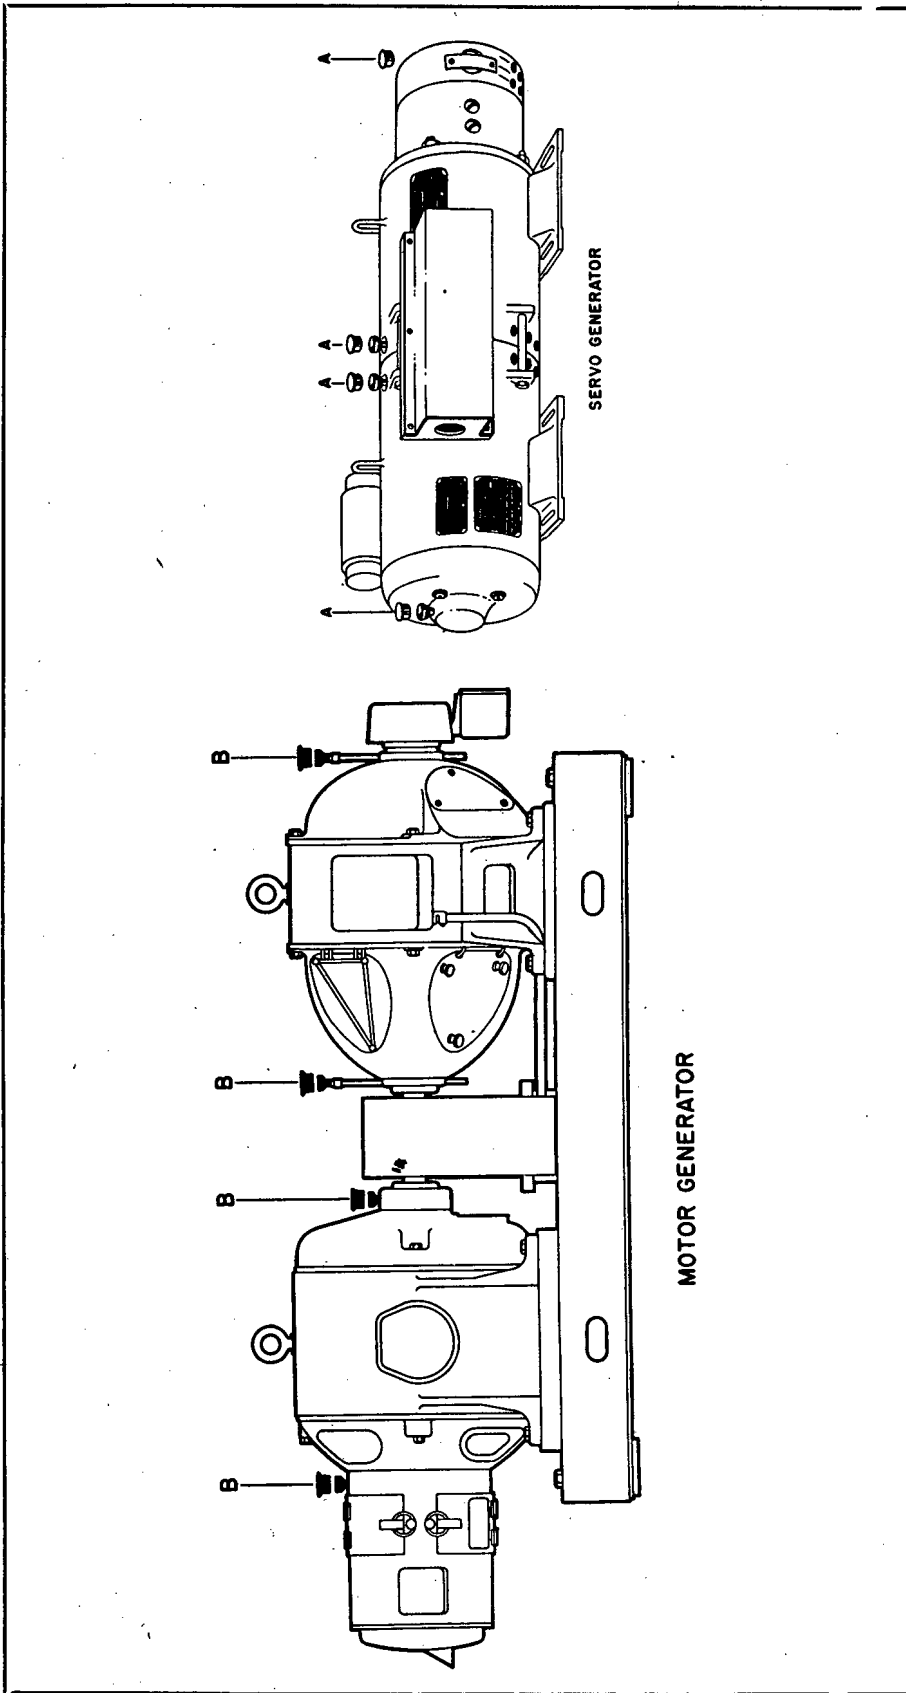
Lubrication of Servo Generator and Motor Generator
